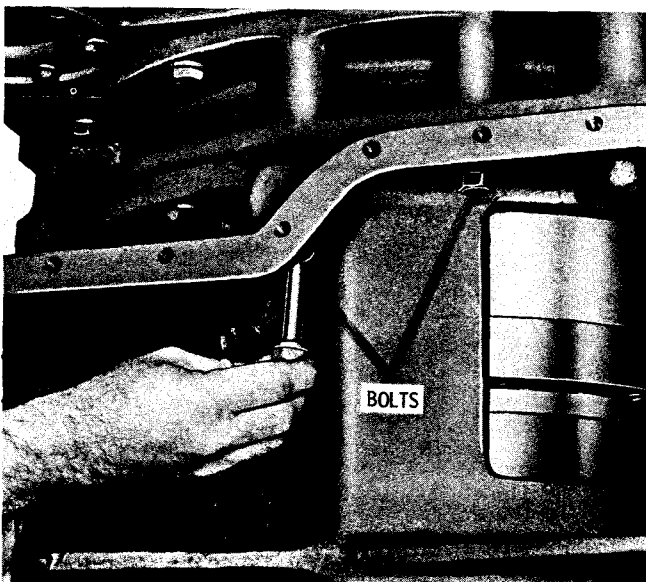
Installing converter housing bolts at bottom of transmission (CBT, CLBT, VCLBT)
